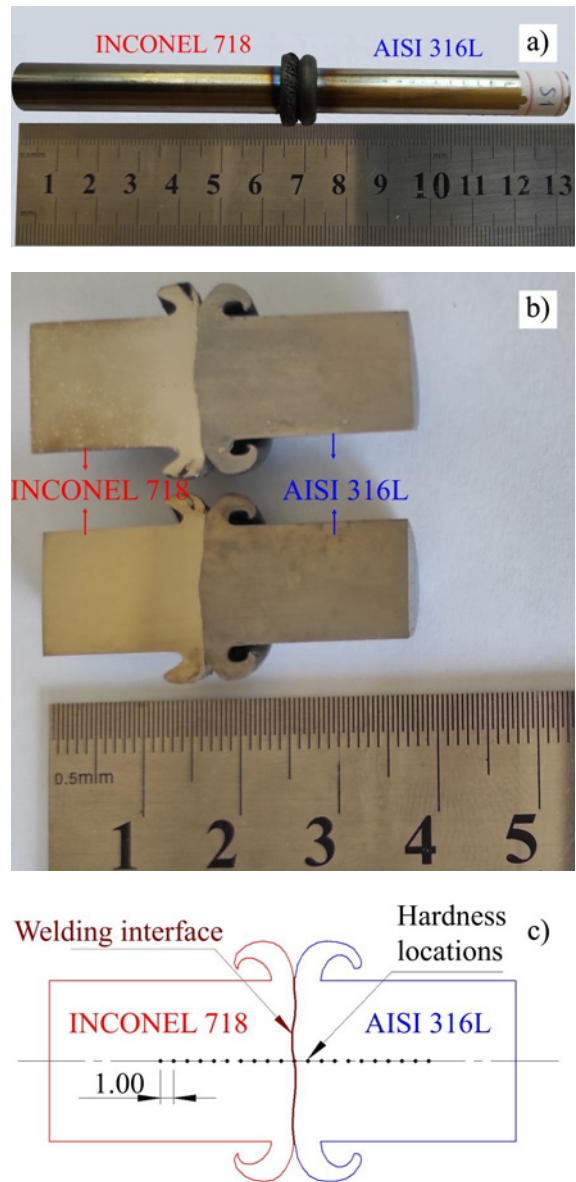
(a) Welded specimen: (b) cross section and (c) hardness measurement locations.
